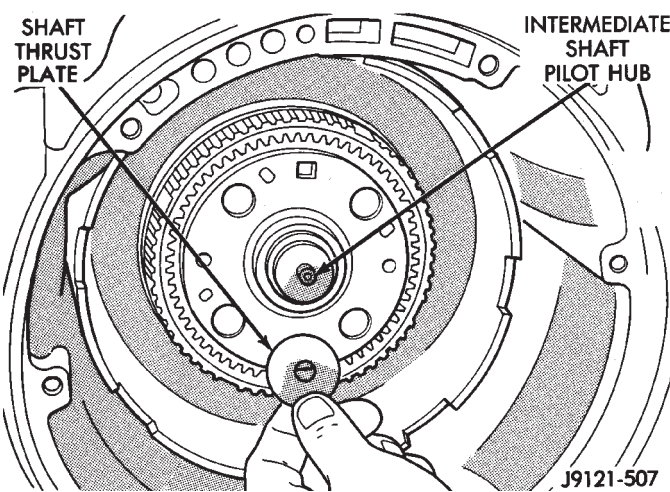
Removing Intermediate Shaft Thrust Plate (46RH)
